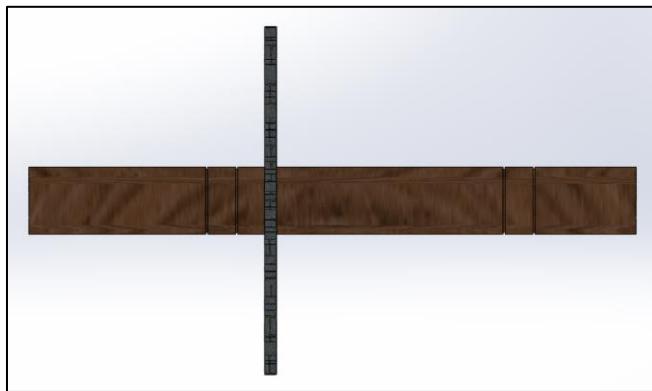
Tolerancing for the Shaft with the Gear Controlling Pulley
